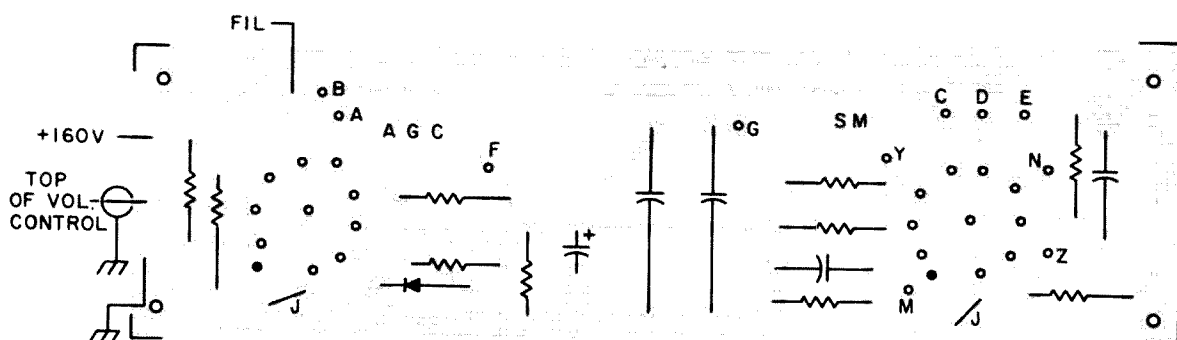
Component layout (foil side view). J used on 6.3 V models; also jumper A to B, C to D. 28 V models: Omit (2) J; Fil to A; jumper D to E.
